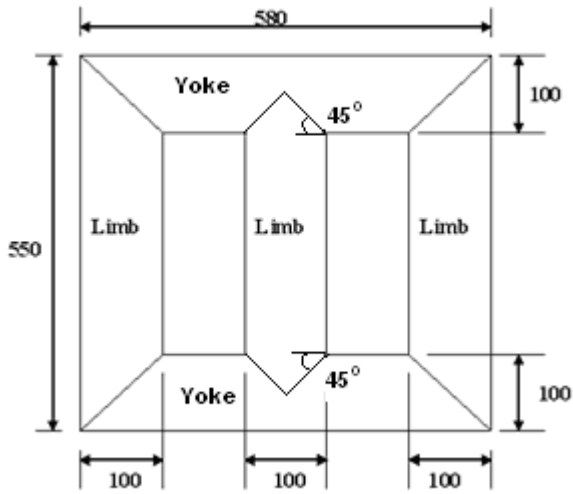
Dimension (mm) of 45° T-joint 100kVA transformer model
